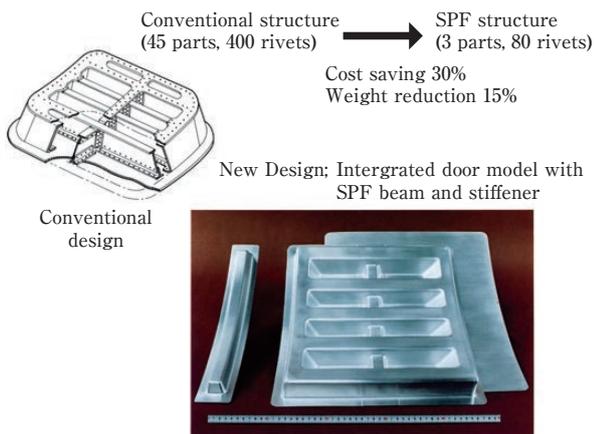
Integrated door model formed using a 7475 superplastic sheet compared with a conventional structure⁵⁰⁾.
